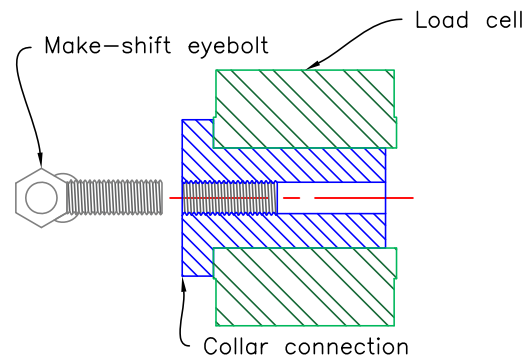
Cross-section of a collar connection fitted inside of a load cell
